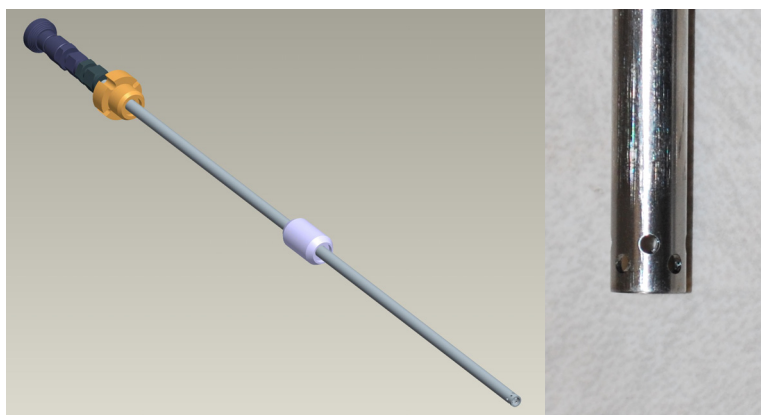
Oxygen sparger used during oxygen sparging experiment. The sparger is an open tube (6.2 mm ID) with 2 mm holes (right-hand image) drilled near the open tip of the sparger. This design resulted in larger O₂ bubbles that spiraled through the molten salt resulting in a stirring action. This design also prevented clogging of the sparger.
